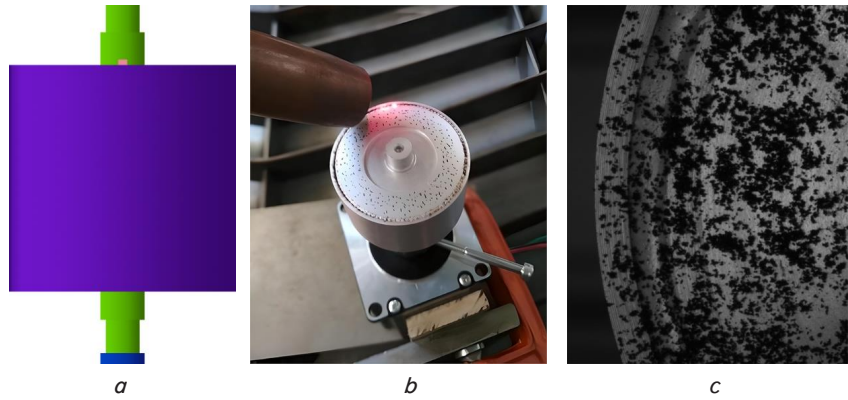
Welding the lid to the cup (material – alloy 7005): a – welded part (side view); b – a fragment of a welding bench with a welded part; c – a fragment of the weld (a contrasting speckle pattern is visible near the seam)
